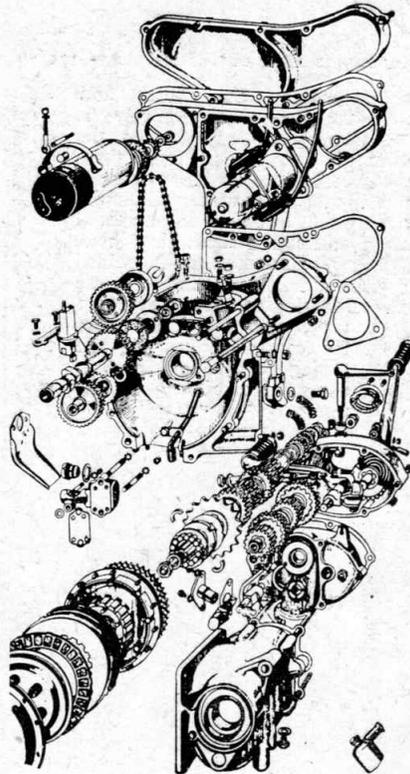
and 2 show engine and gearbox components up to engine No. ZA7-11192. Fig. 3 illustrates the 650 c.c. engine and the 500 c.c. engine after No. AA7-101; and Figs. 4 and 5 depict models
